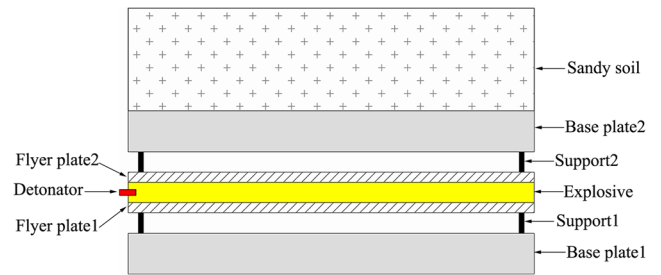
Schematic diagram of DSEW using sandy soil to restrict the upper welded plate
